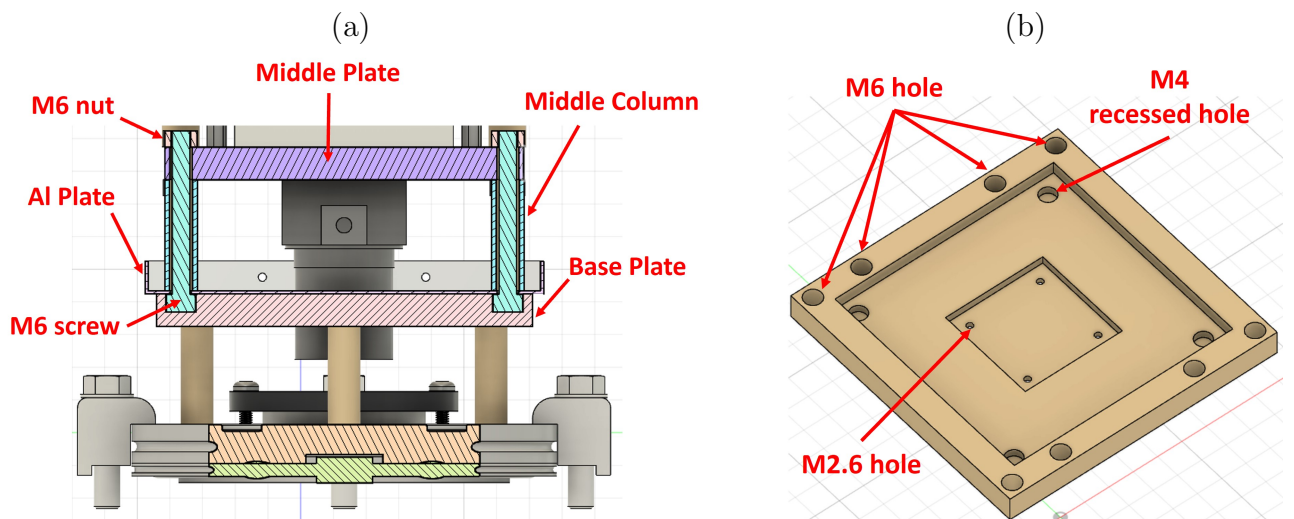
(a) The cross-section of the Middle Plate and Base Plate. (b) The CAD drawing of the Middle Plate.
